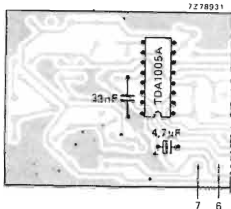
Printed-circuit board component side, showing component layout of Fig. 13.
